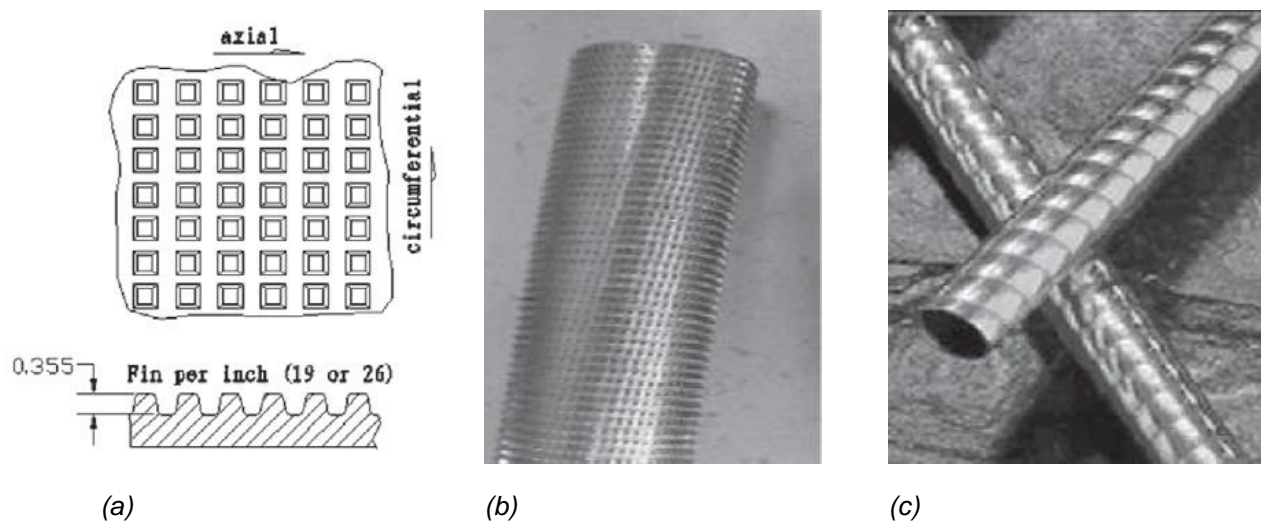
Experimental setup and the enhanced tubes. (a) fins on Turbo-CAB tubes, (b) Turbo-CAB-19 fpi, and (c) Korodense. [13]
